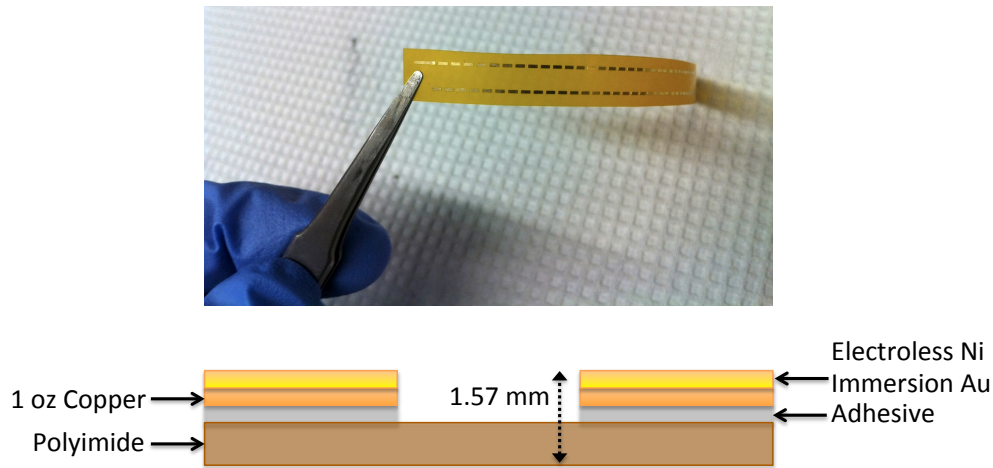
Image (top) and schematic (bottom) of a flexible printed circuit board (PCB) substrate designed for a printed thermoelectric device.
